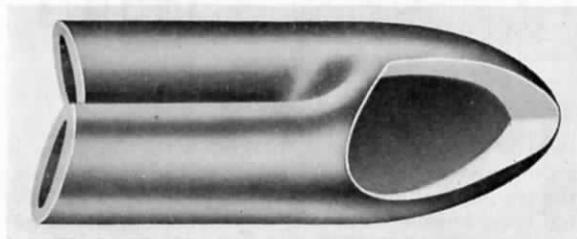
ENLARGED VIEW OF MACHINE-FORGED
